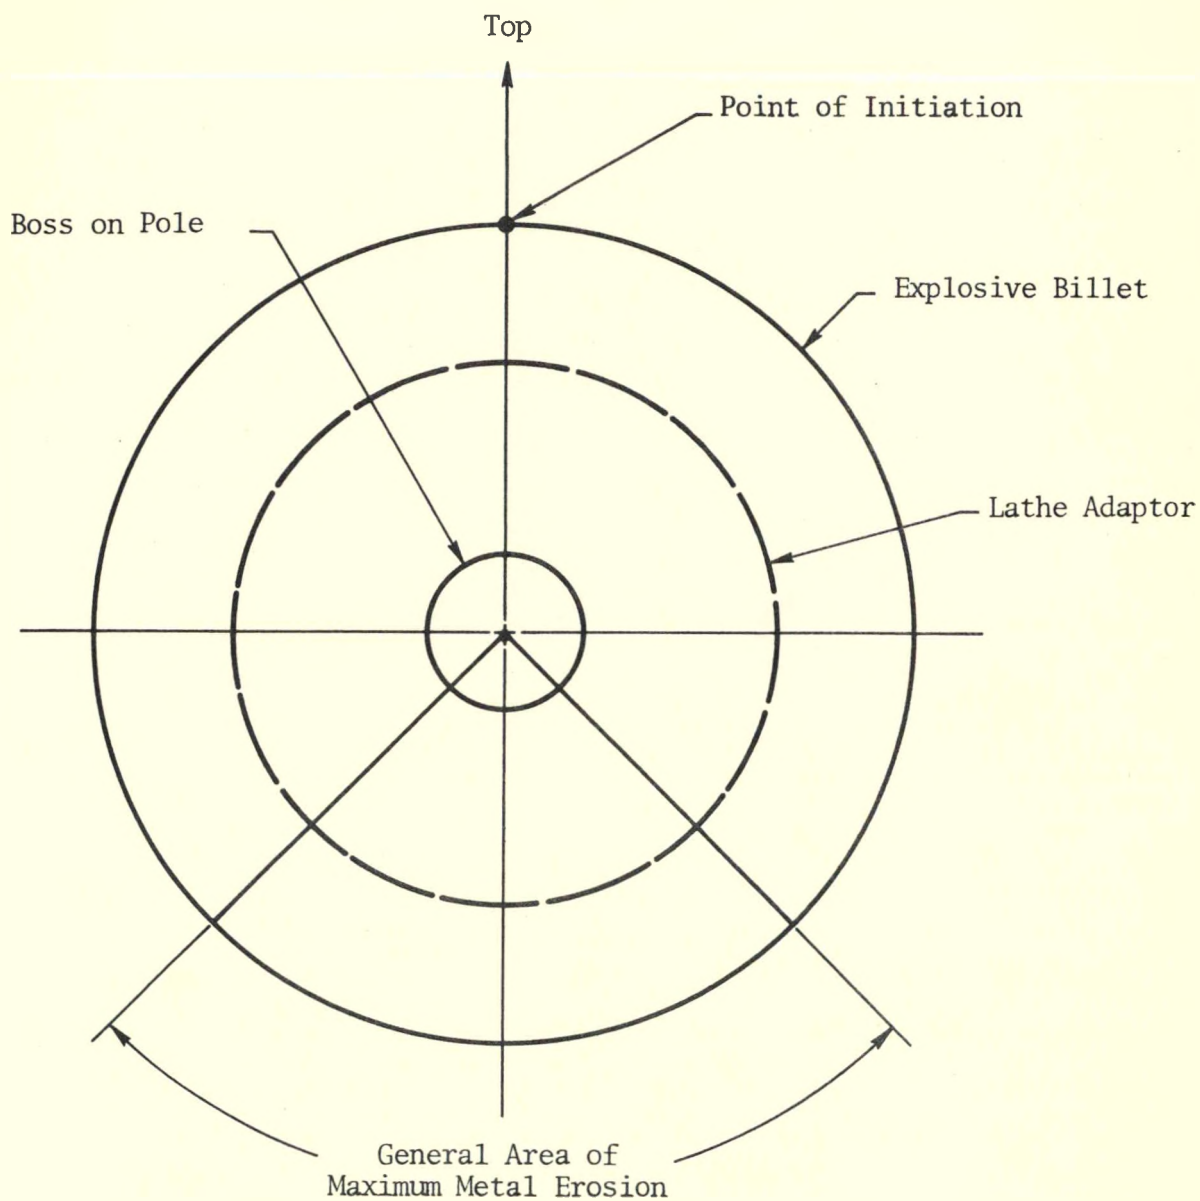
Test No. 2 and 5 Lathe Adaptor and Initiation Point
